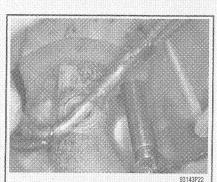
makes them easier to remove. There is one on each side of the pipe. You will need a flex joint to remove them
